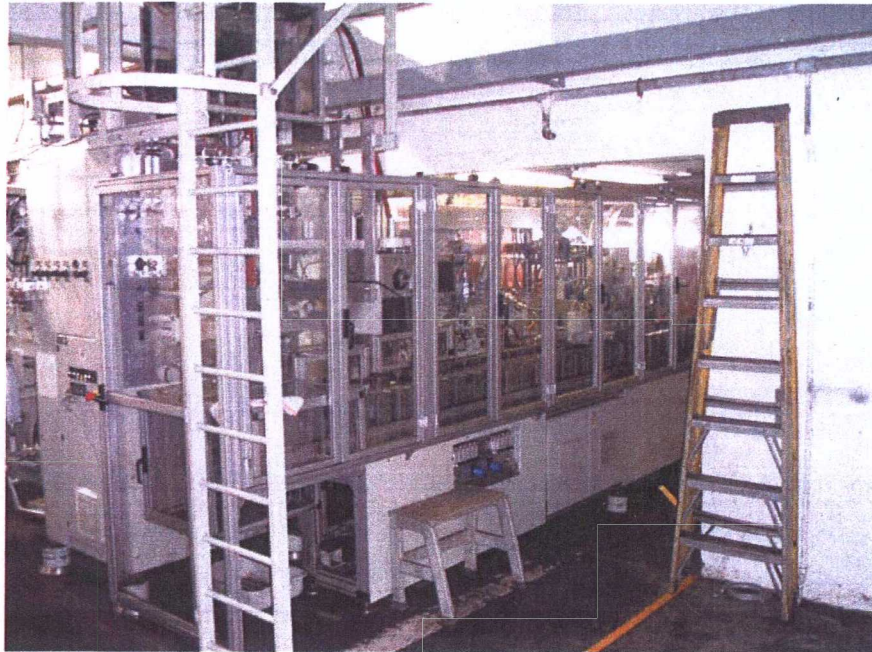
Facing west; view of the northern coffee roaster on 4th floor of Building 6.
